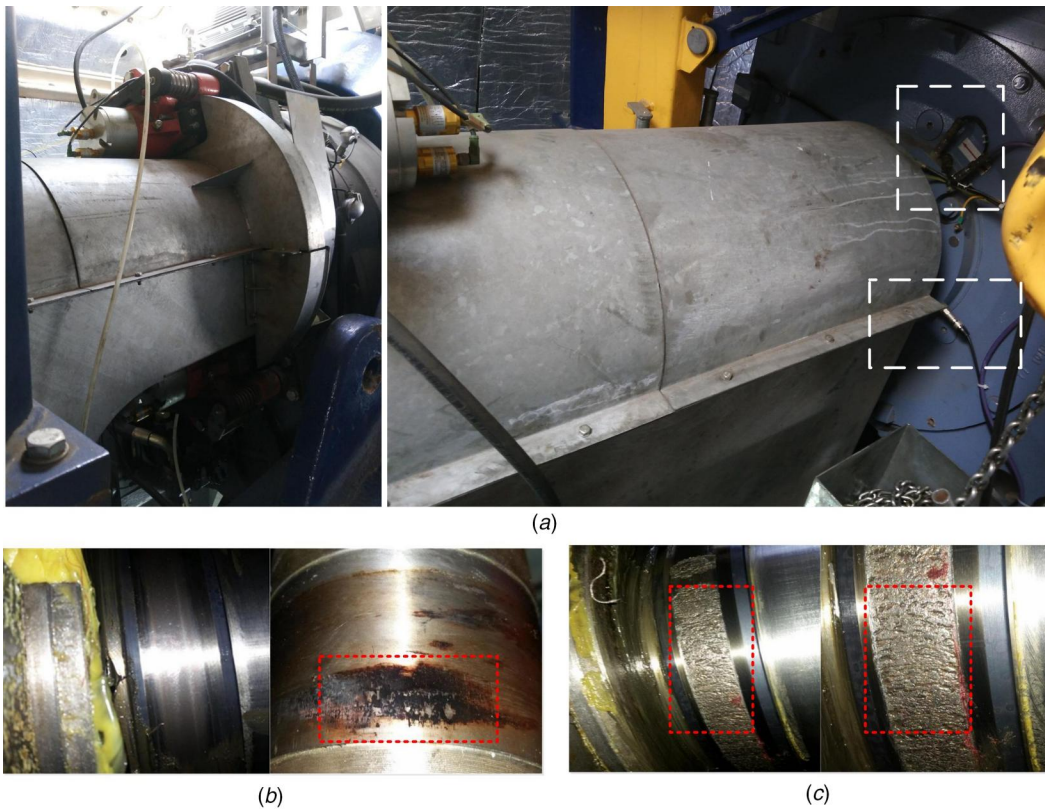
(a) Vibration accelerometer installation locations on the wind turbine generator shown in horizontal and vertical orientations, (b) inner race electrical corrosion failure observed in the bearing, and (c) worn inner surface of the bearing's inner race
